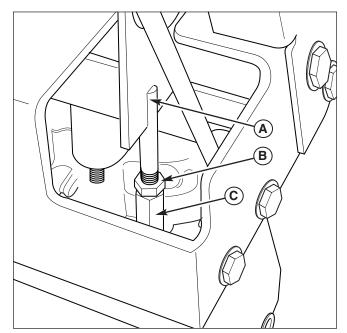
Adjusting the Speed of the Faster Wheel (RH side shown)
